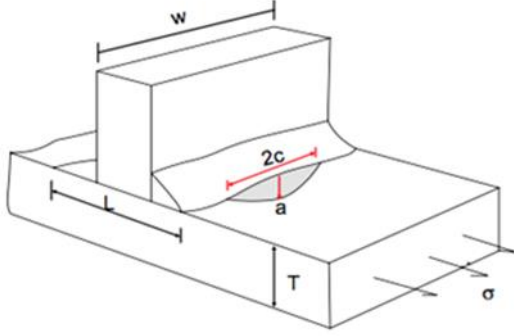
Fillet welded joint with elliptical surface crack at the weld toe
